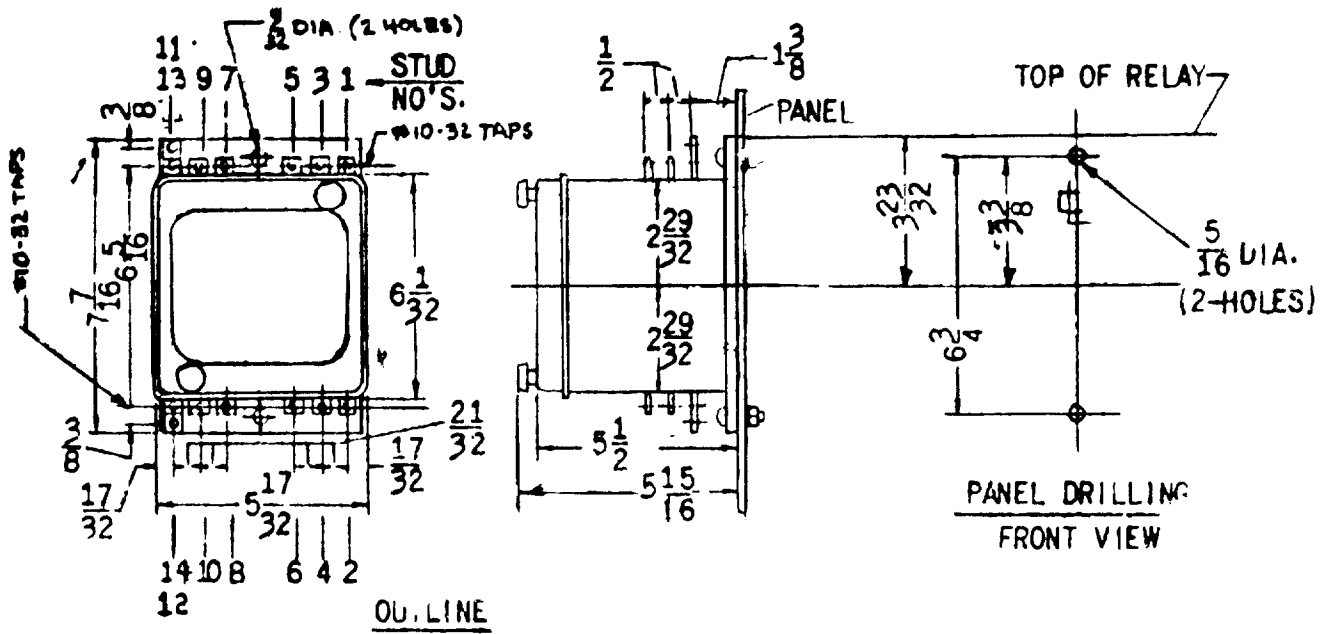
(0104A8526-7) Outline and Panel Drilling for Front-Connected Type-HFA151 Relay
